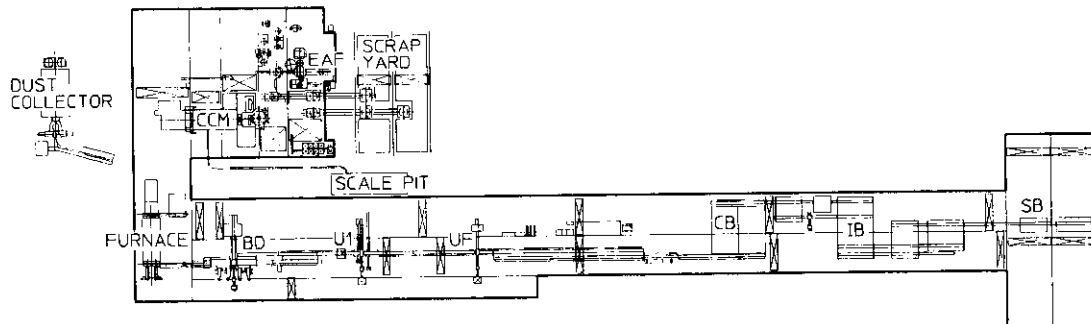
Layout of Miaoli Works of Tung-Ho Steel
